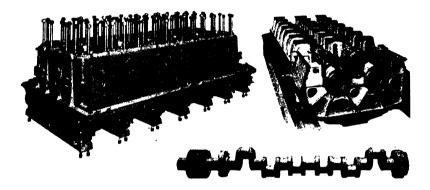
Cylinder block, crankcase and crankshaft of 2200 h.p. Sulzer engine.
